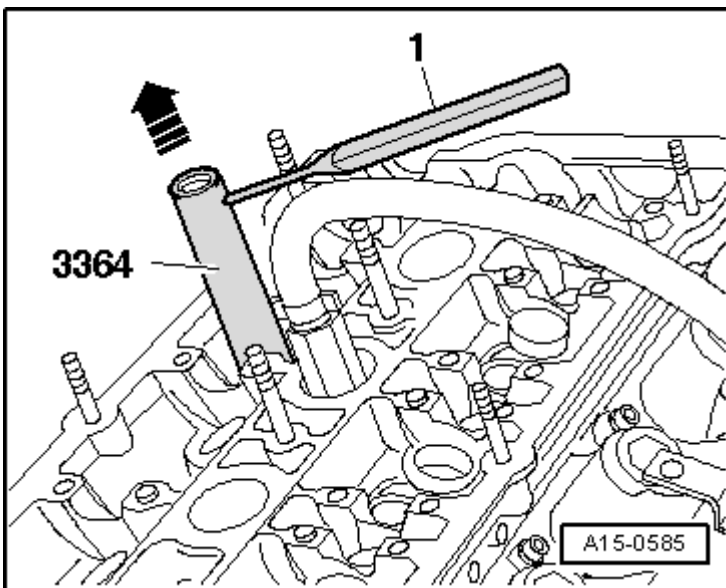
Identifying Placement Of Lower Part Of Valve Seal Removal Tool 3364 On To Valve Stem Oil Seal
